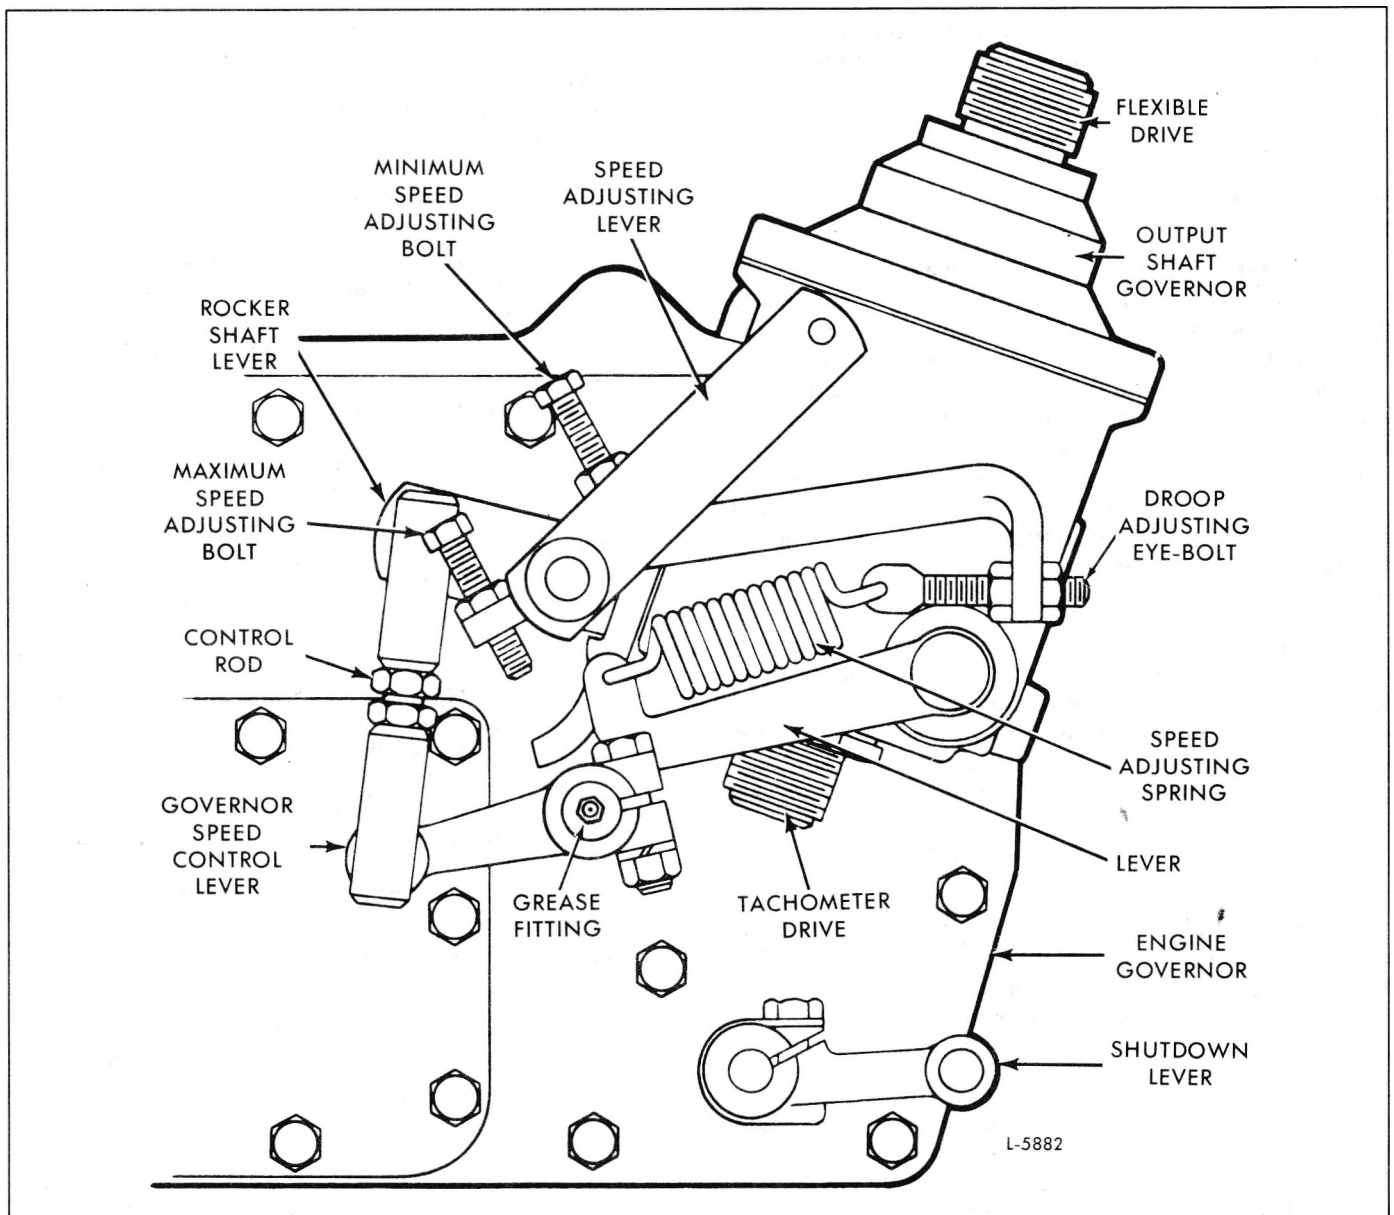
Mechanical Cable-Driven Output Shaft Governor and Linkage
